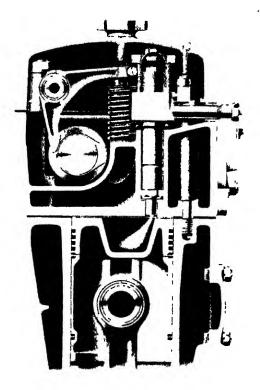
Showing Combustion Chamber of Leyland Diesel Engine
